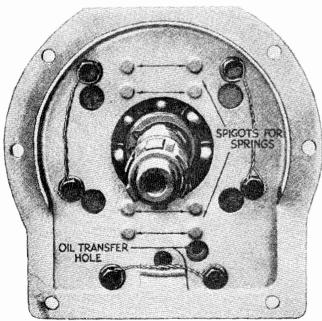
Showing the oil transfer hole and method of wiring bolts. The Gearbox casing has to be drilled on early models whereas all present production are already drilled.
